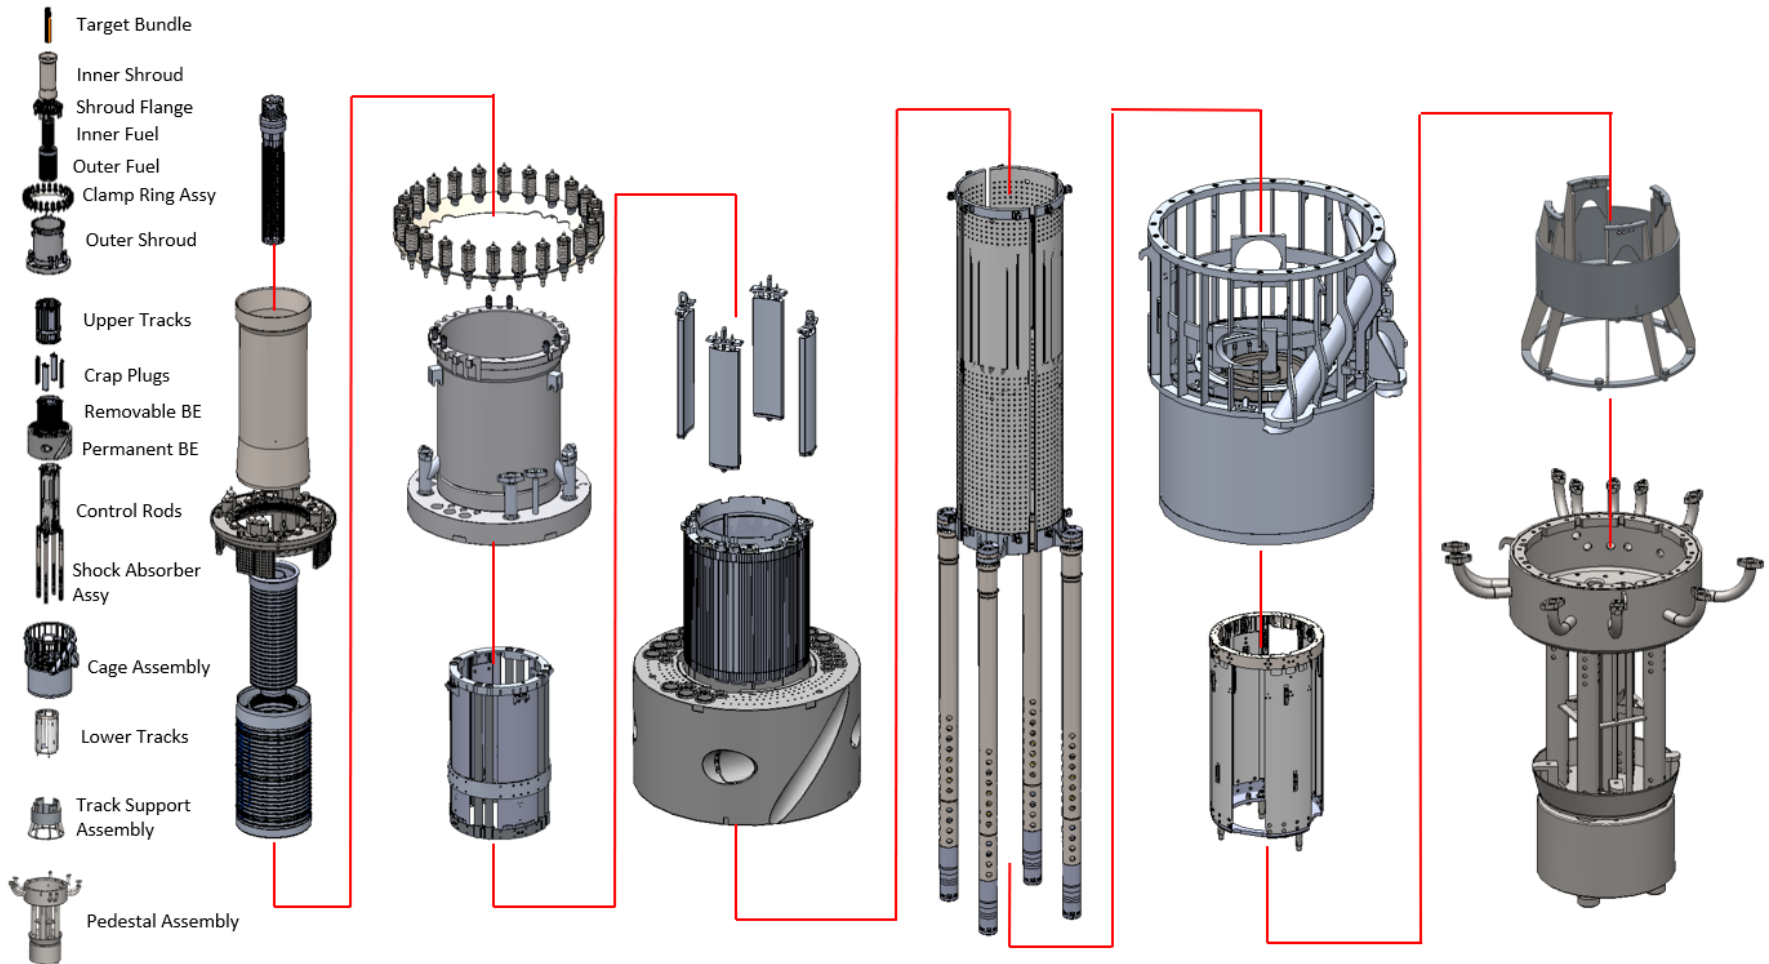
Components that will be disassembled by ORNL prior to RPV removal.
